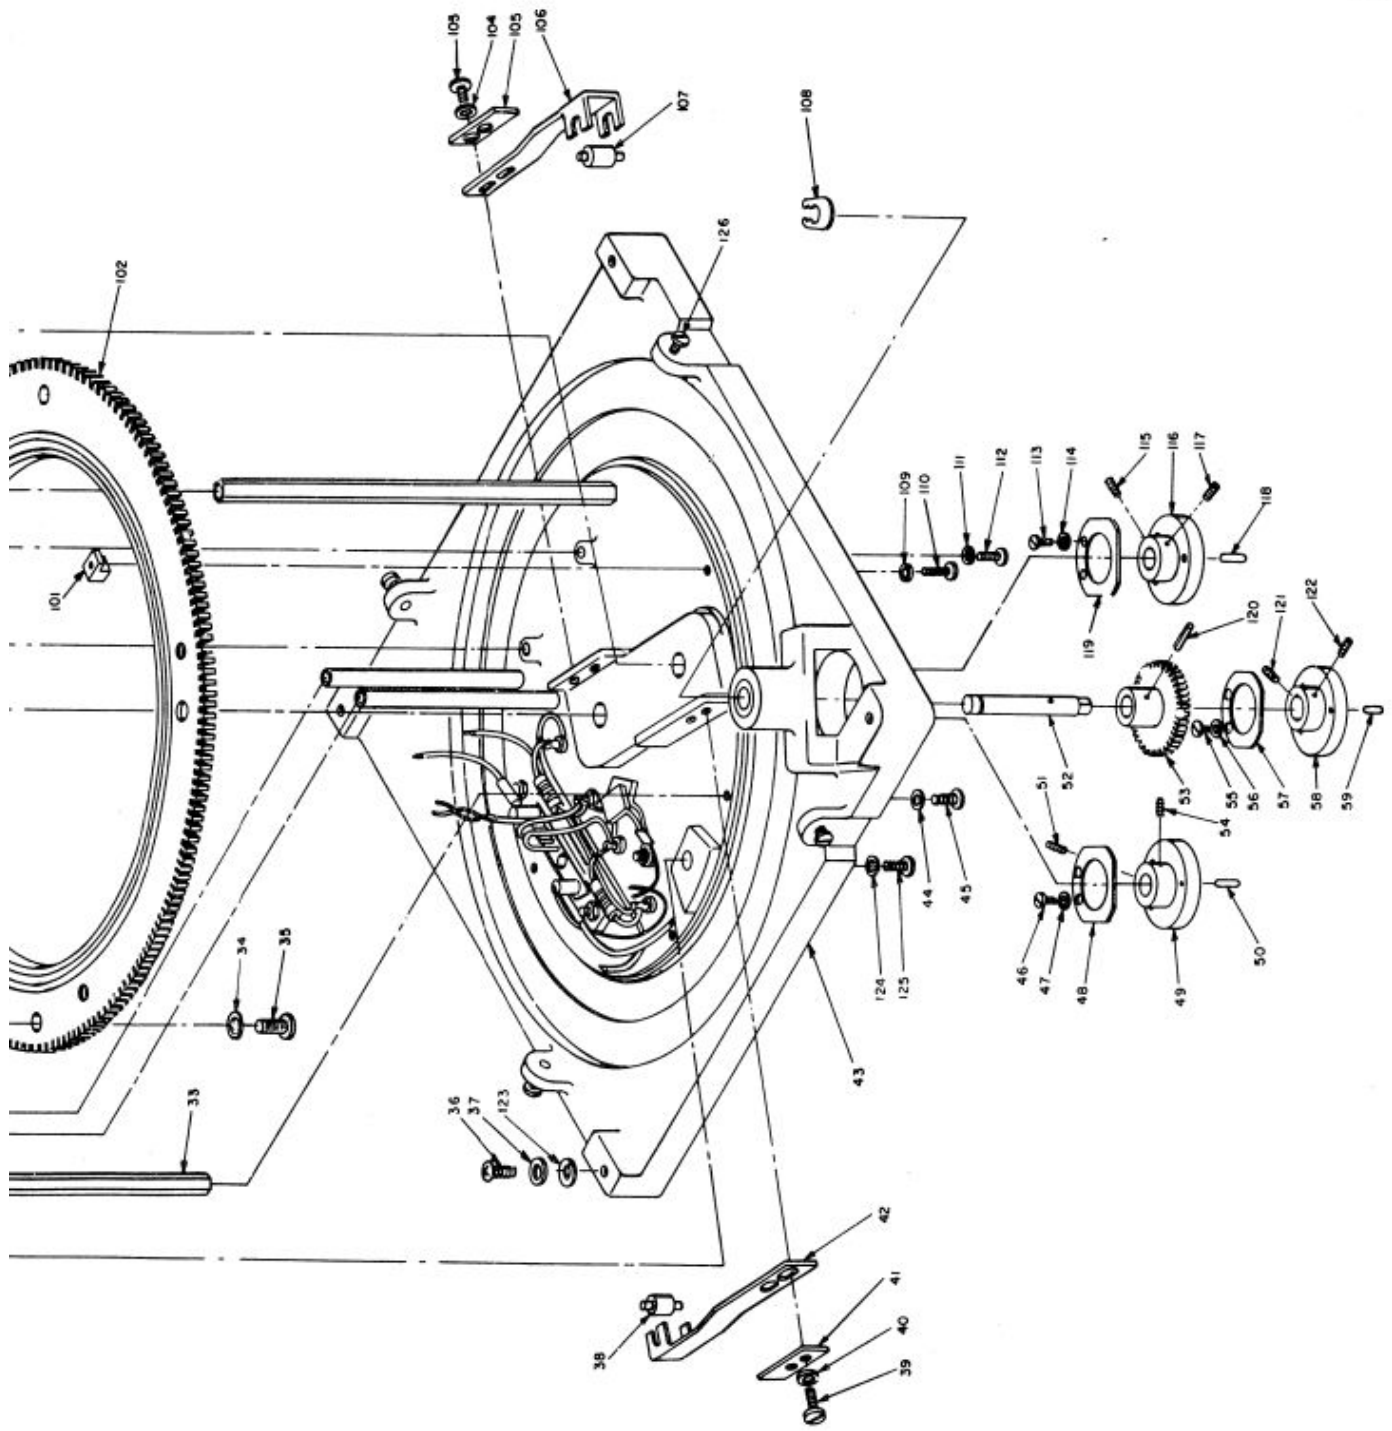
RF TURRET ASSEMBLY RT-662 - MODULE 1A12
